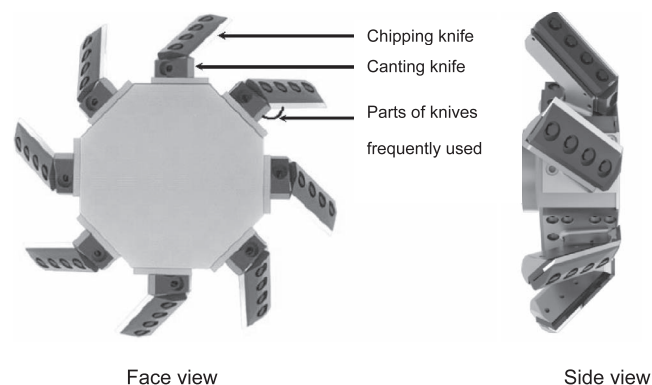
Chipper-canter cutter head with separate chipping and canting knives.
